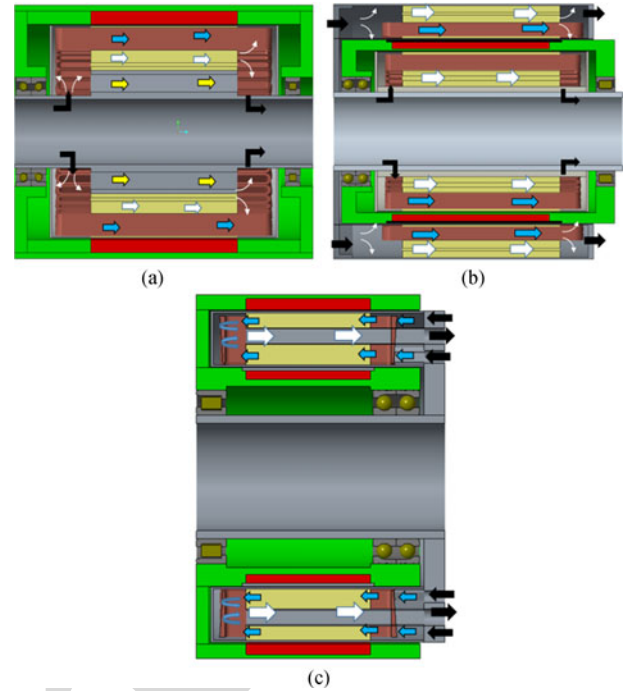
General housing design and cooling configurations for OR, DS, and DR topologies. (a) Outer rotor machine design. (b) Double stator machine design. (c) Double rotor machine design.
